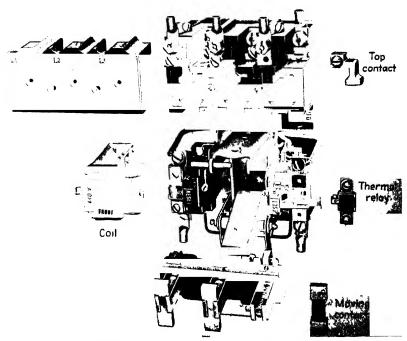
Square D three-pole a c small size contactor sparated into part assemblies to show the construction
